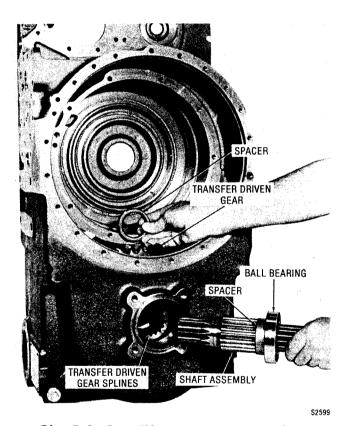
Installing rear output shaft assembly (-1 models with two-piece or rear output shaft)
